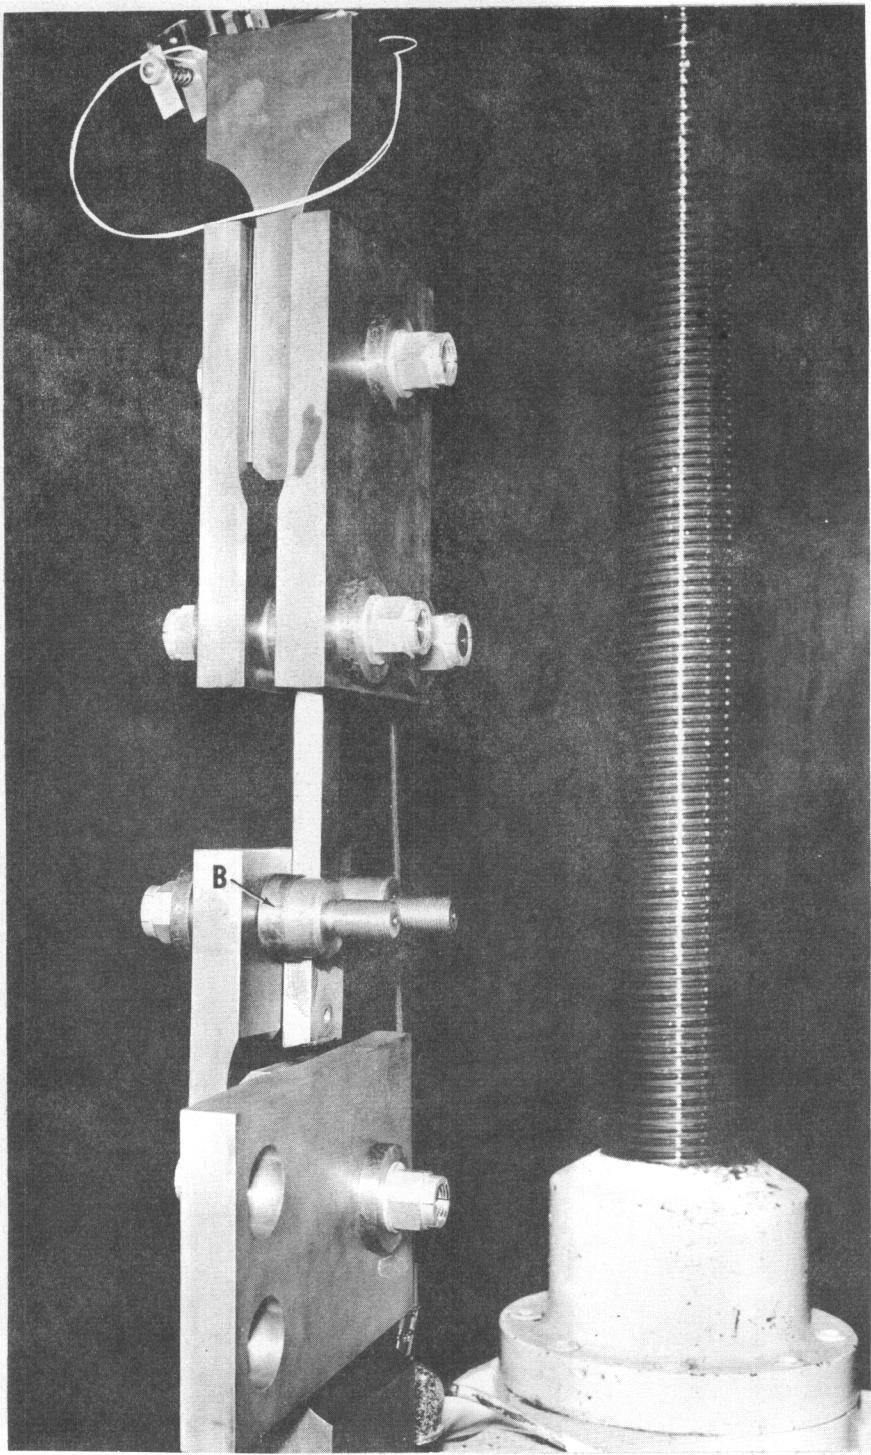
OBLIQUE VIEW OF TEST FIXTURE.
